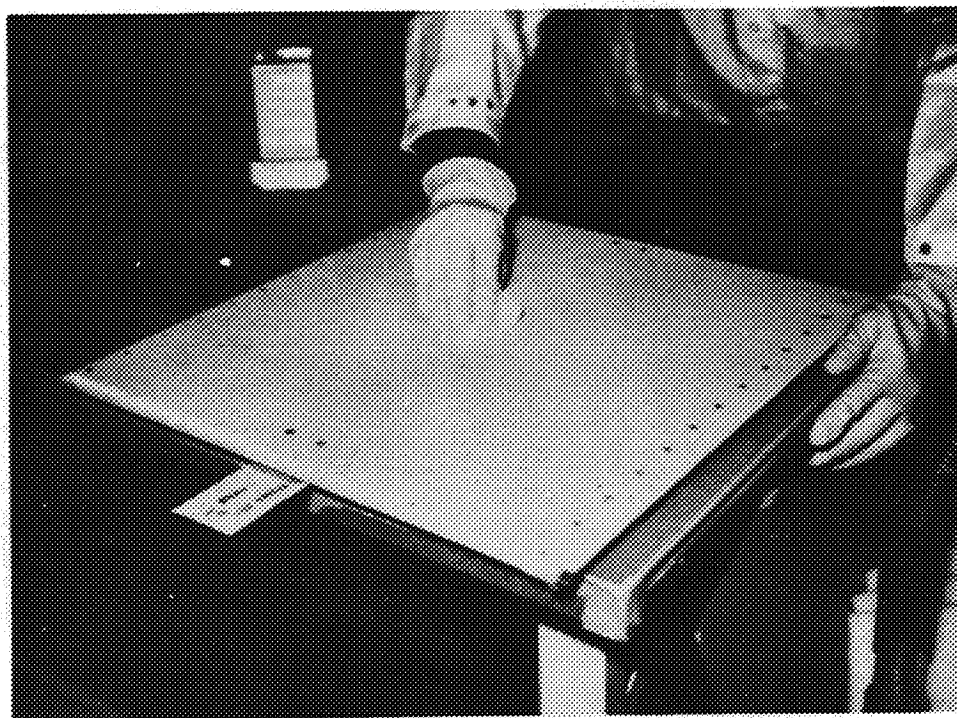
FABRICATION OF KEY/KEYWAY AND BOND – ON TPS ASSEMBLY
